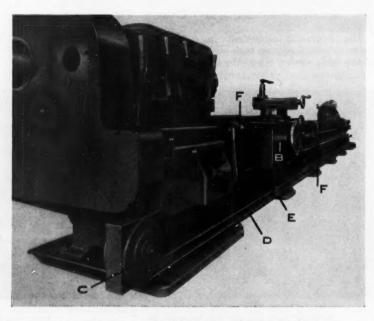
Nebel lathe equipped with power rapid traverse attachment
